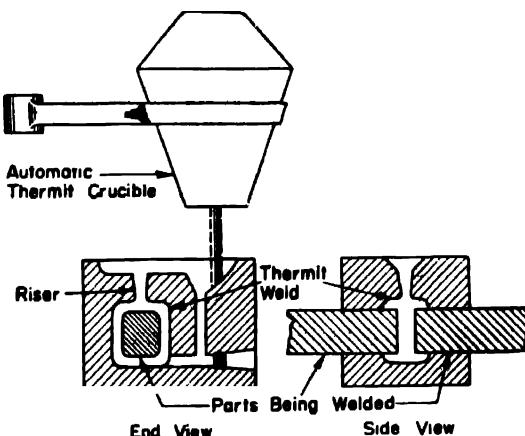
Sketch of a crucible and mold for Thermit welding.
